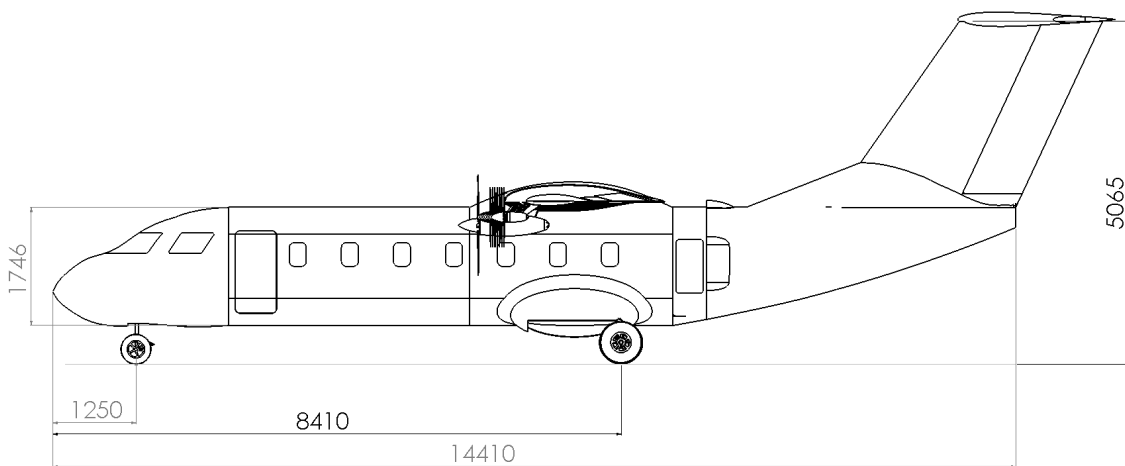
Side view of the E-Commuter (dimensions given in mm).
